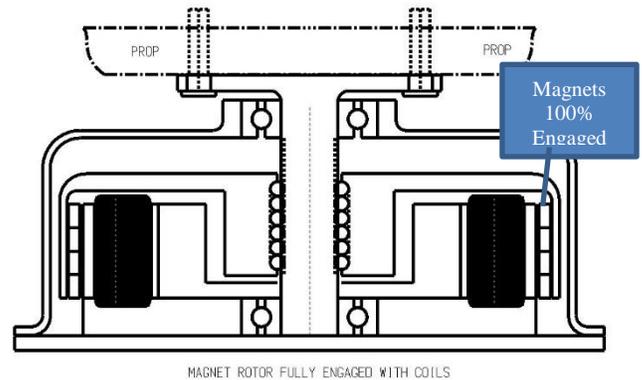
Cross section view of a typical DuraTrac PM motor with rotor magnets fully engaged with the stator coils
